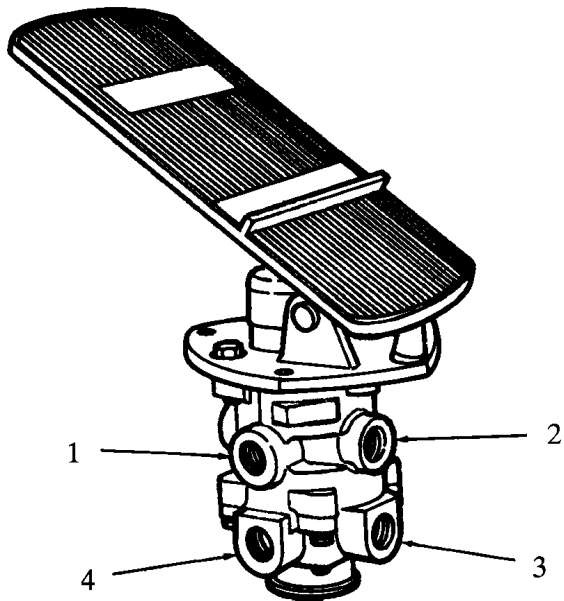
Bendix E6-Treadle (Foot) Brake Valve
